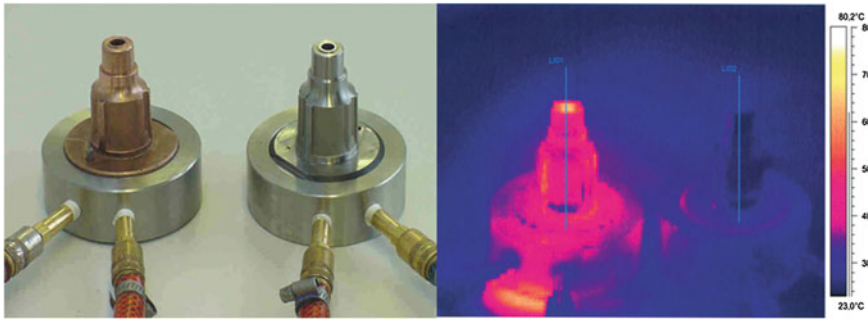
Left: mold inserts made of a cooper alloy and steel in a cooling device, right: temperature distribution in both mold inserts
